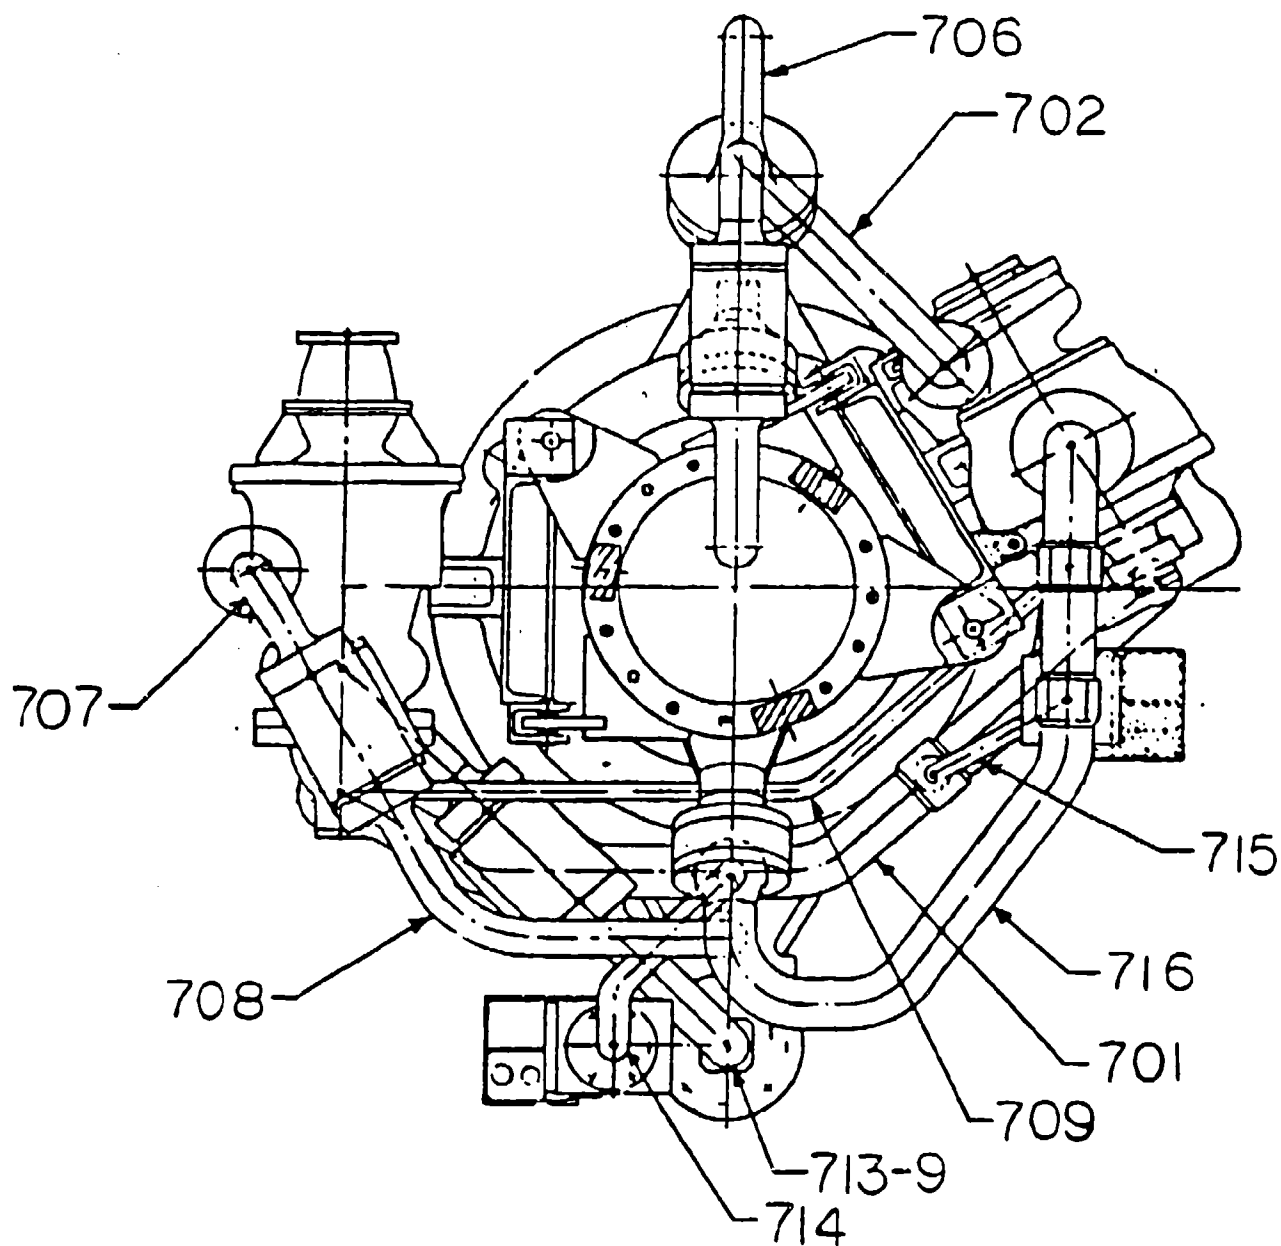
RS-44 DUCT ASSEMBLY LOCATIONS
